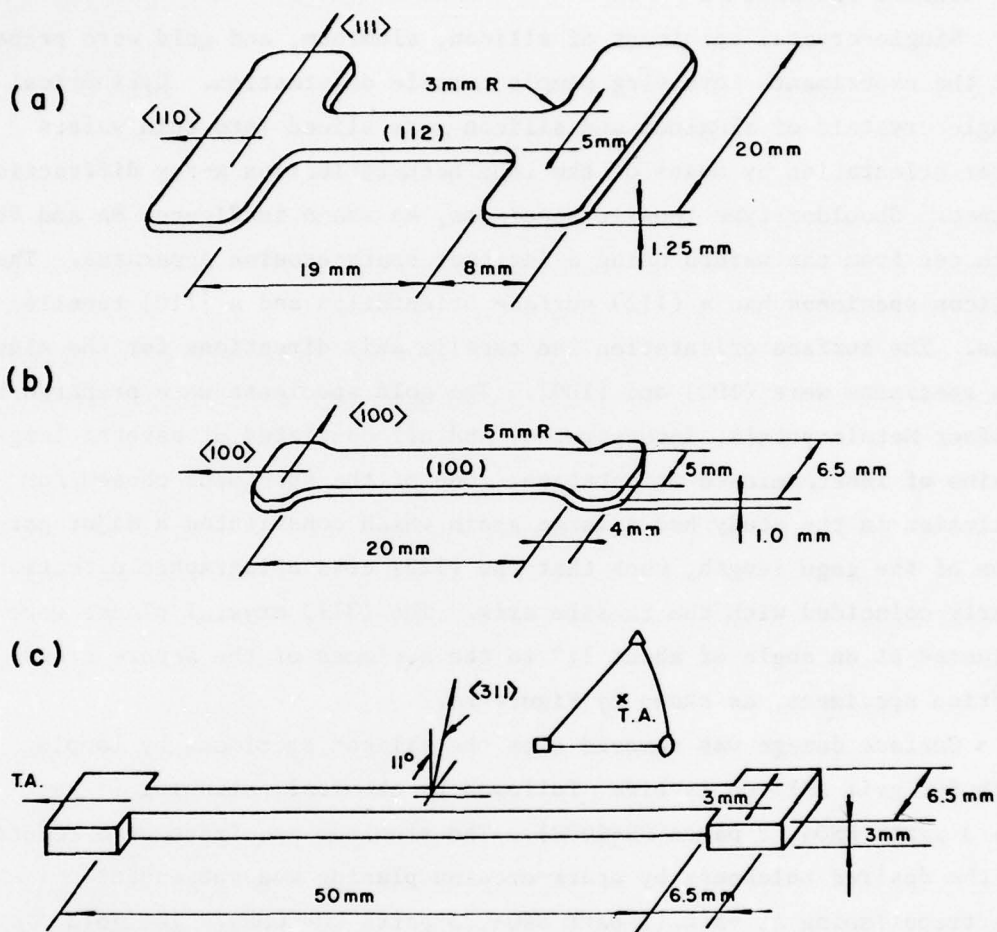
Specimen configurations employed in the tensile tests of single crystals: (a) silicon specimens - mounted in combination clamp and shoulder-support grips, with ball-bearing connection to the loading rods; (b) aluminum specimens - clamped in ball-bearing mounted grip assembly; (c) gold specimens - installed with rigid, clamp-style loading fixture.
